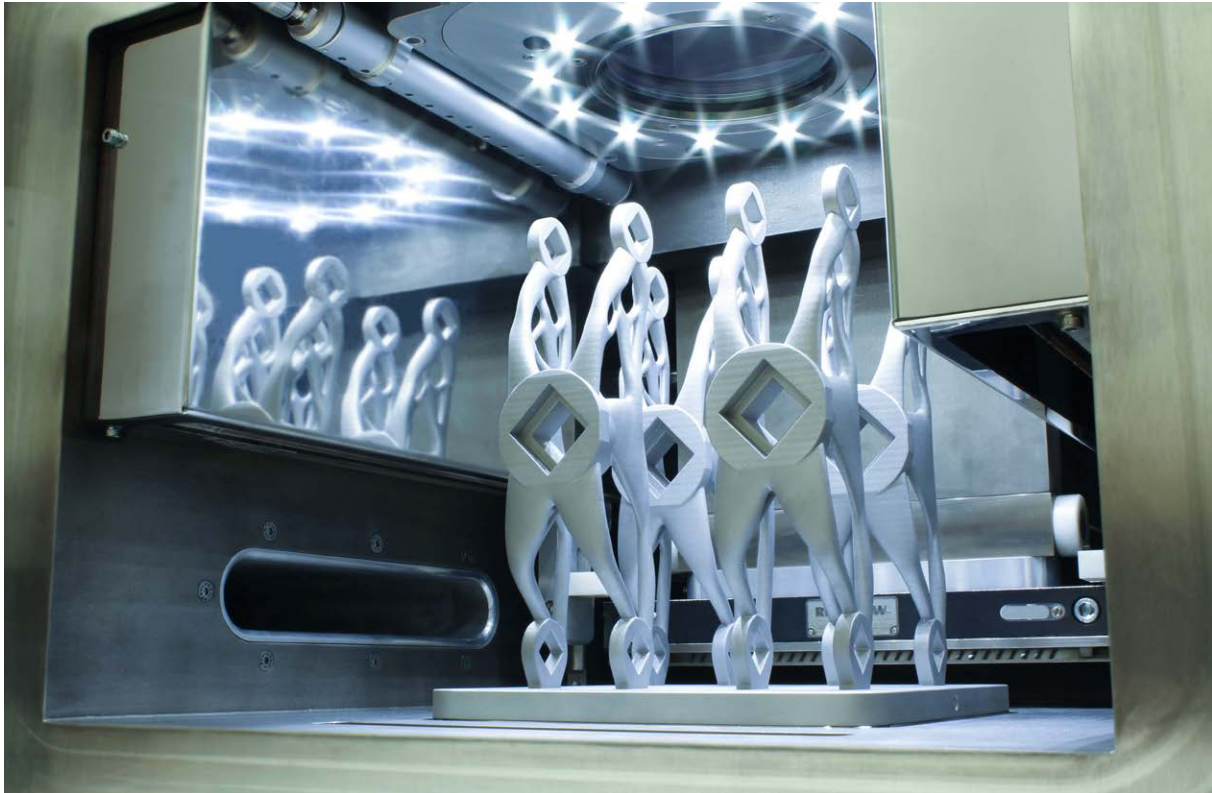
Bleu car hinge component in RenAM 500M build chamber
